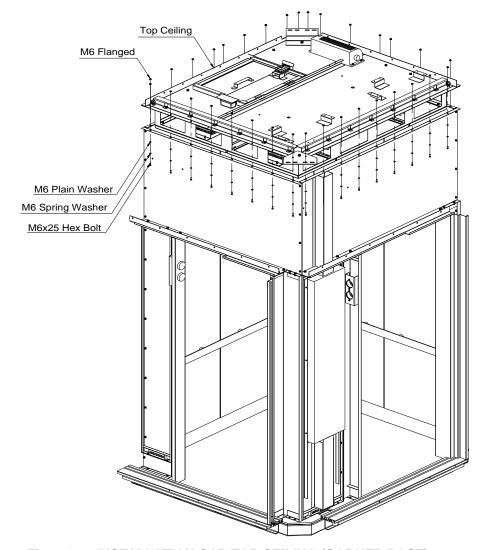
INSTALLATION CAR TOP CEILING (CORNER POST)
